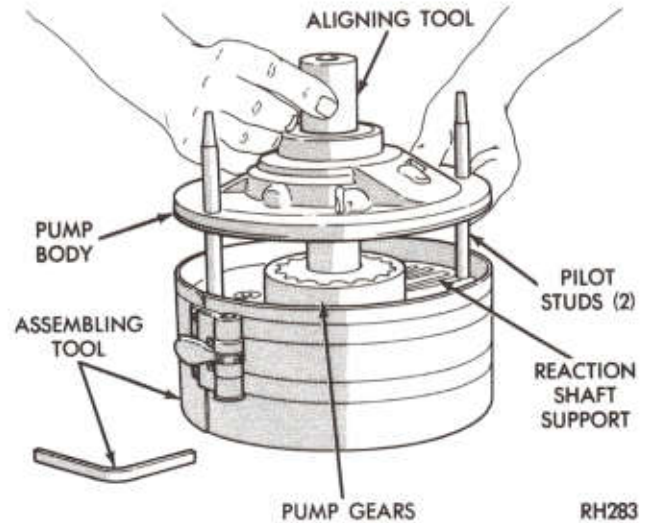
Assemble Pump and Reaction Shaft Support (A-904T and A-999)
